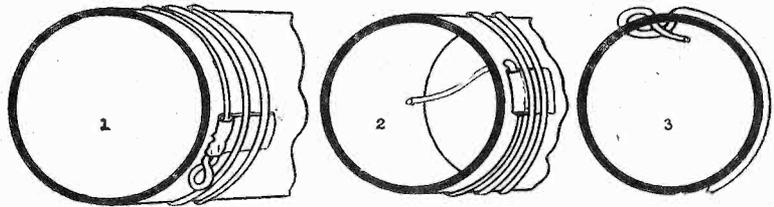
Suggested method of fastening the first turn of the winding in order to prevent working loose. A strip of adhesive tape will do nicely.
